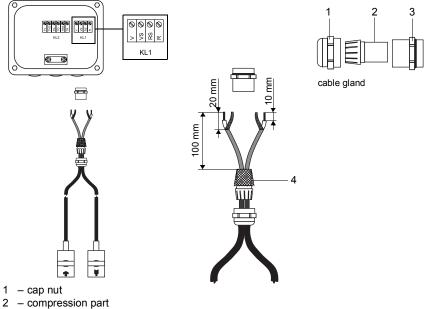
Connection of the transducer cable with plastic jacket and stripped ends
